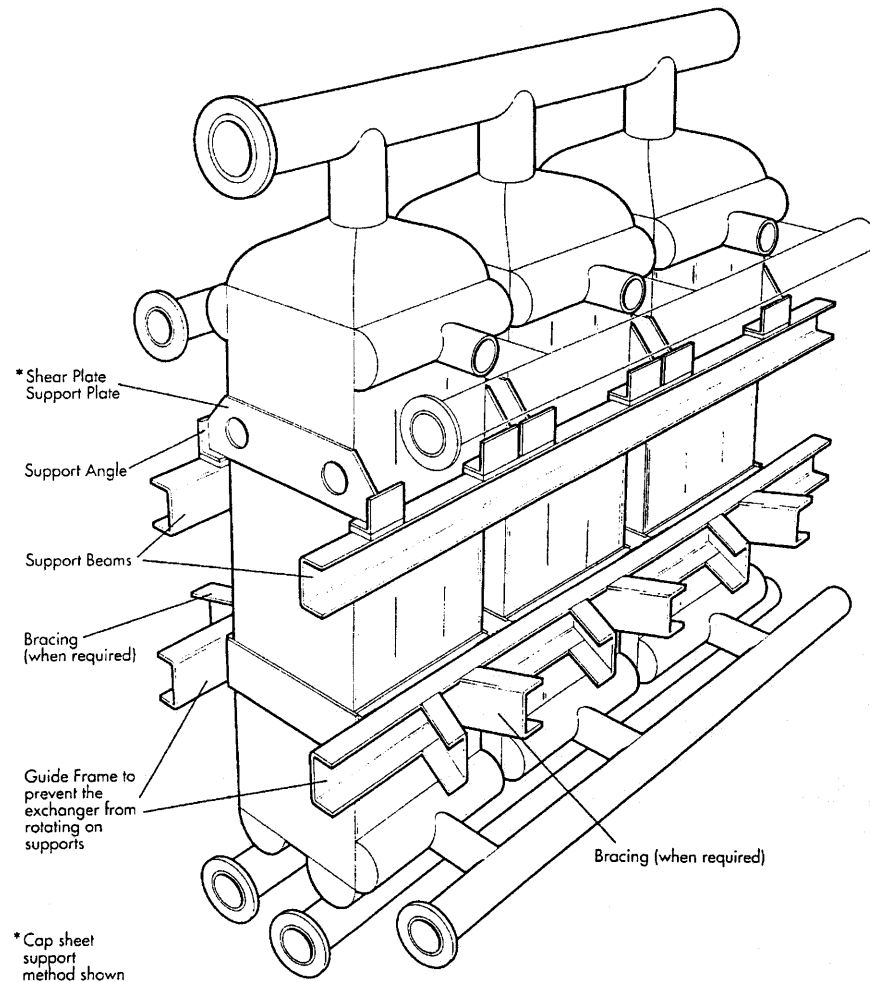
Typical Heat Exchanger Assembly of Three Cores Showing Shear Plate Supports
